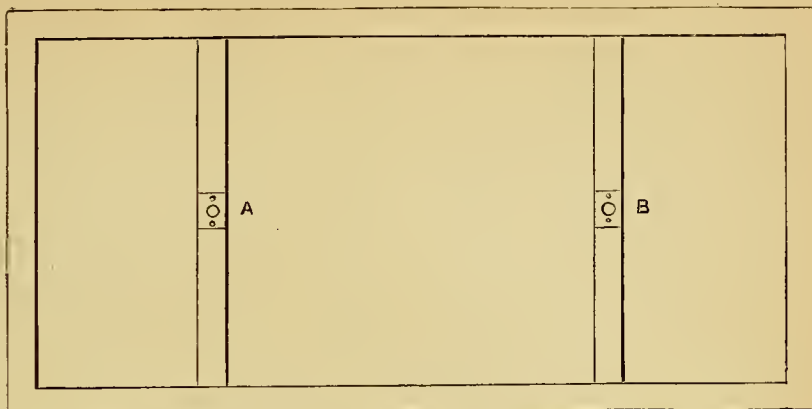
LOWER FRAME. A, B, Bars with Bearings for Spindle.
